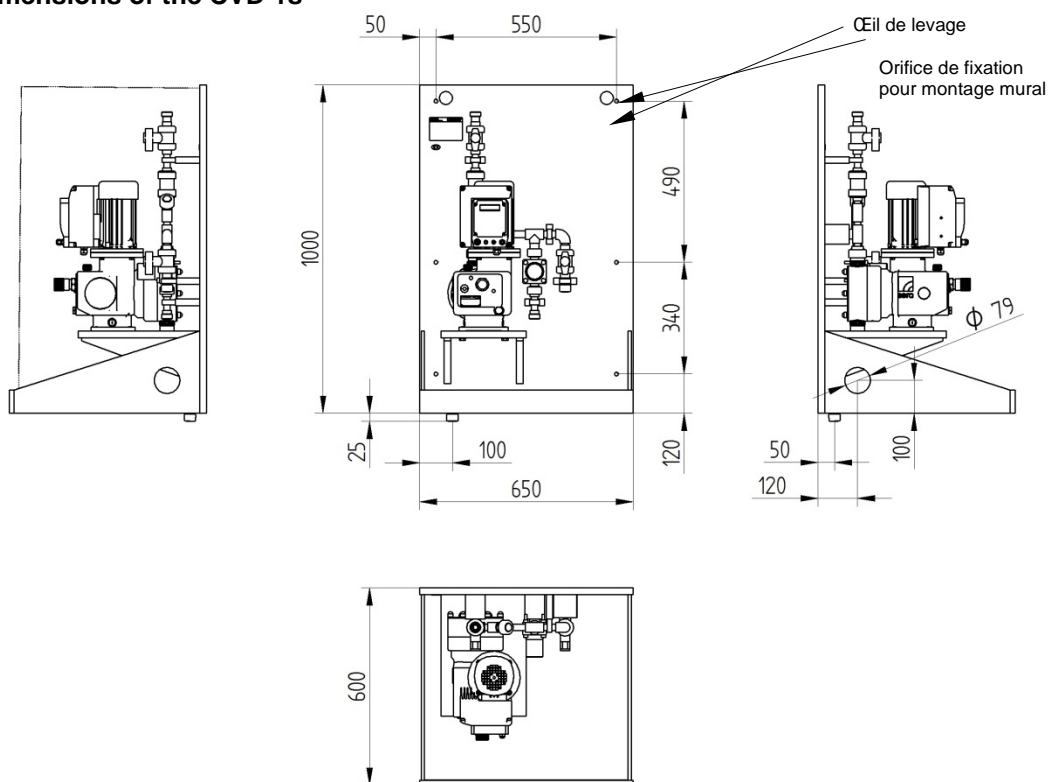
Dimensions of the CVD1s (wall mounting)
